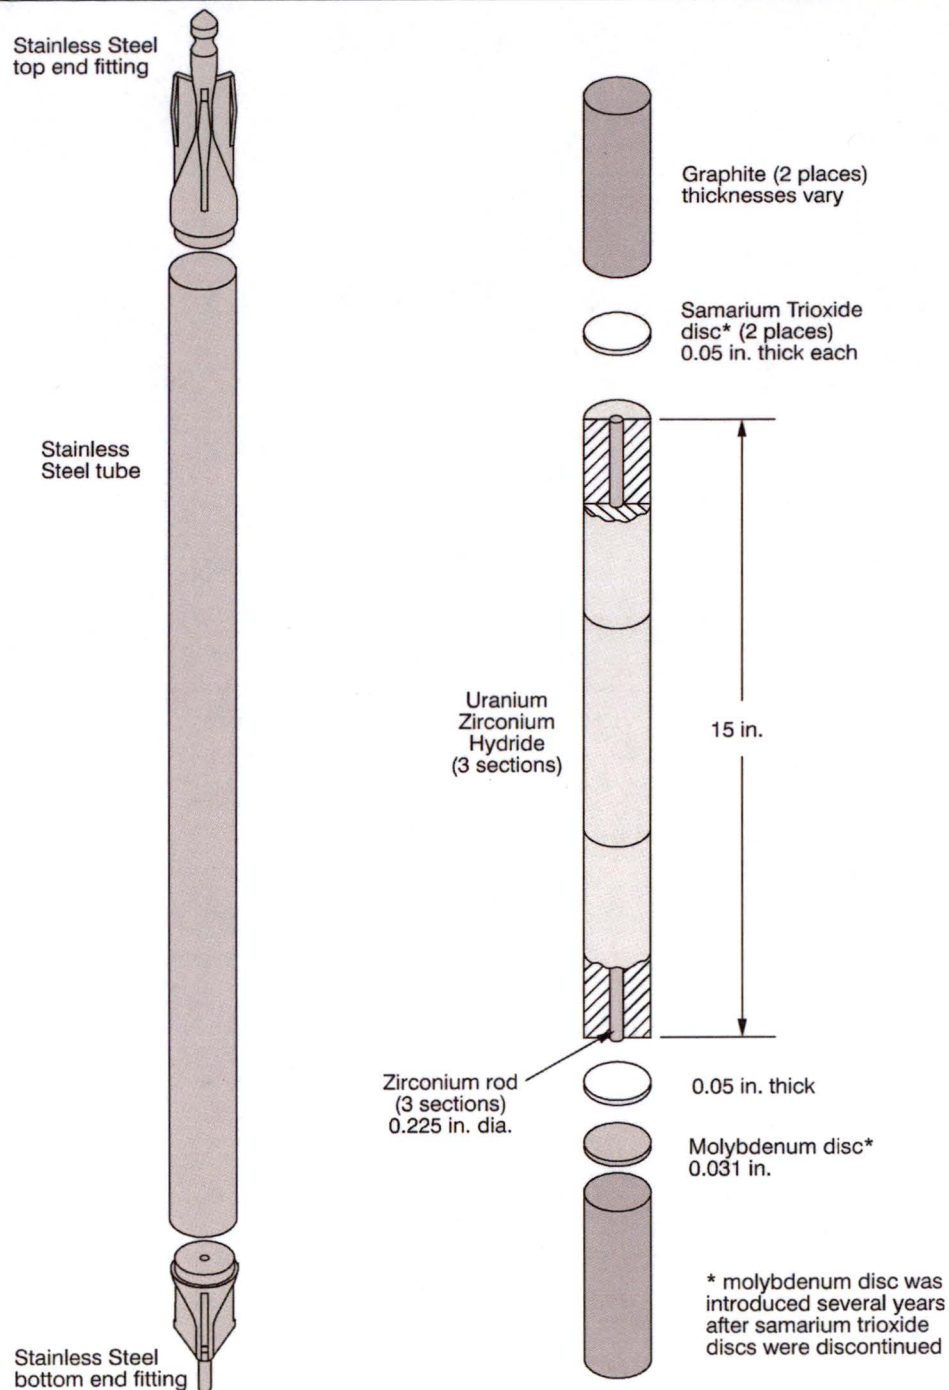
Typical Stainless Steel Clad TRIGA Fuel Element
